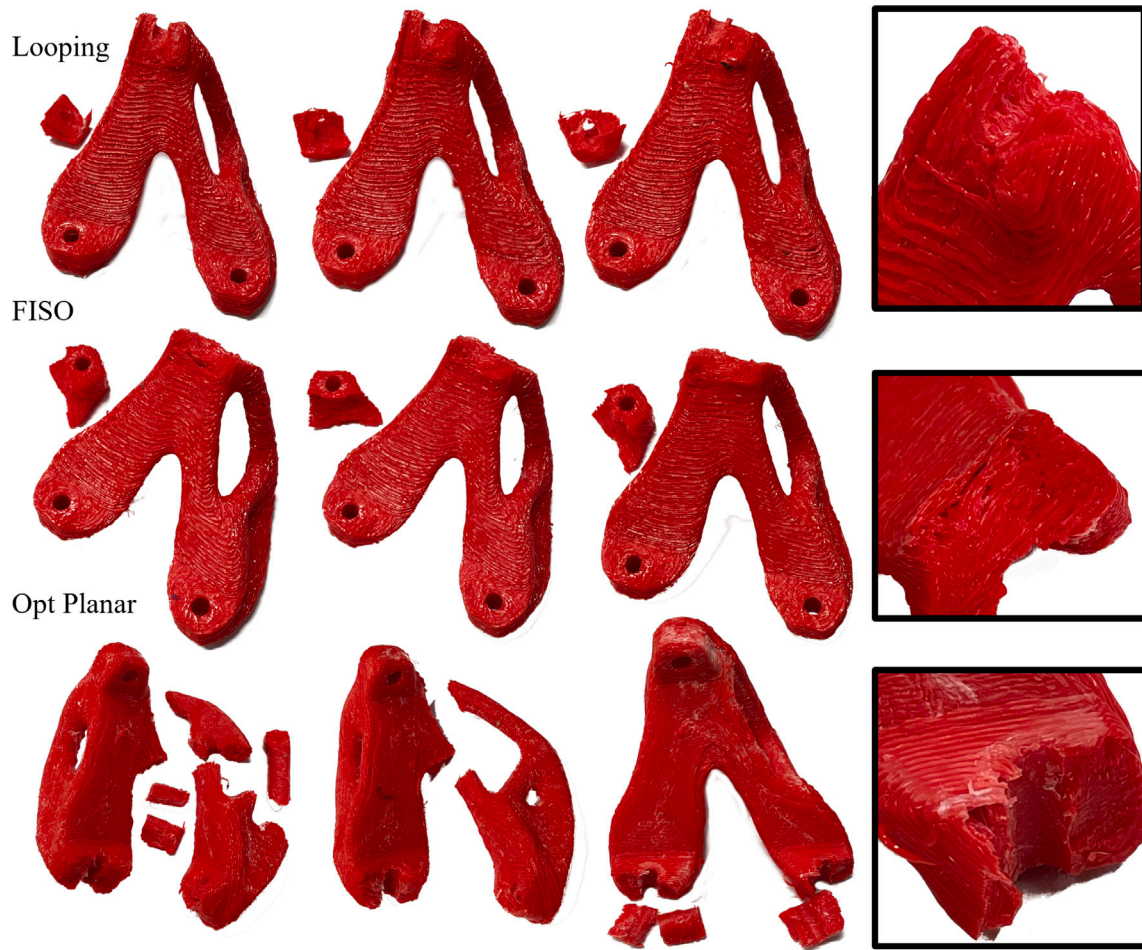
Fracture surfaces after the tensile tests of the *Topopt* example part. Top row: Looping specimen. Middle row: FISO specimen. Bottom row: Optimized planar specimen. On the right the fracture surfaces are shown in more detail.
